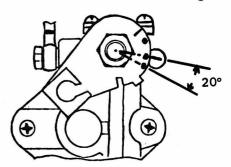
Oil pump should be secured in this position (approximately 20 degrees open) if mixed gas is used.
